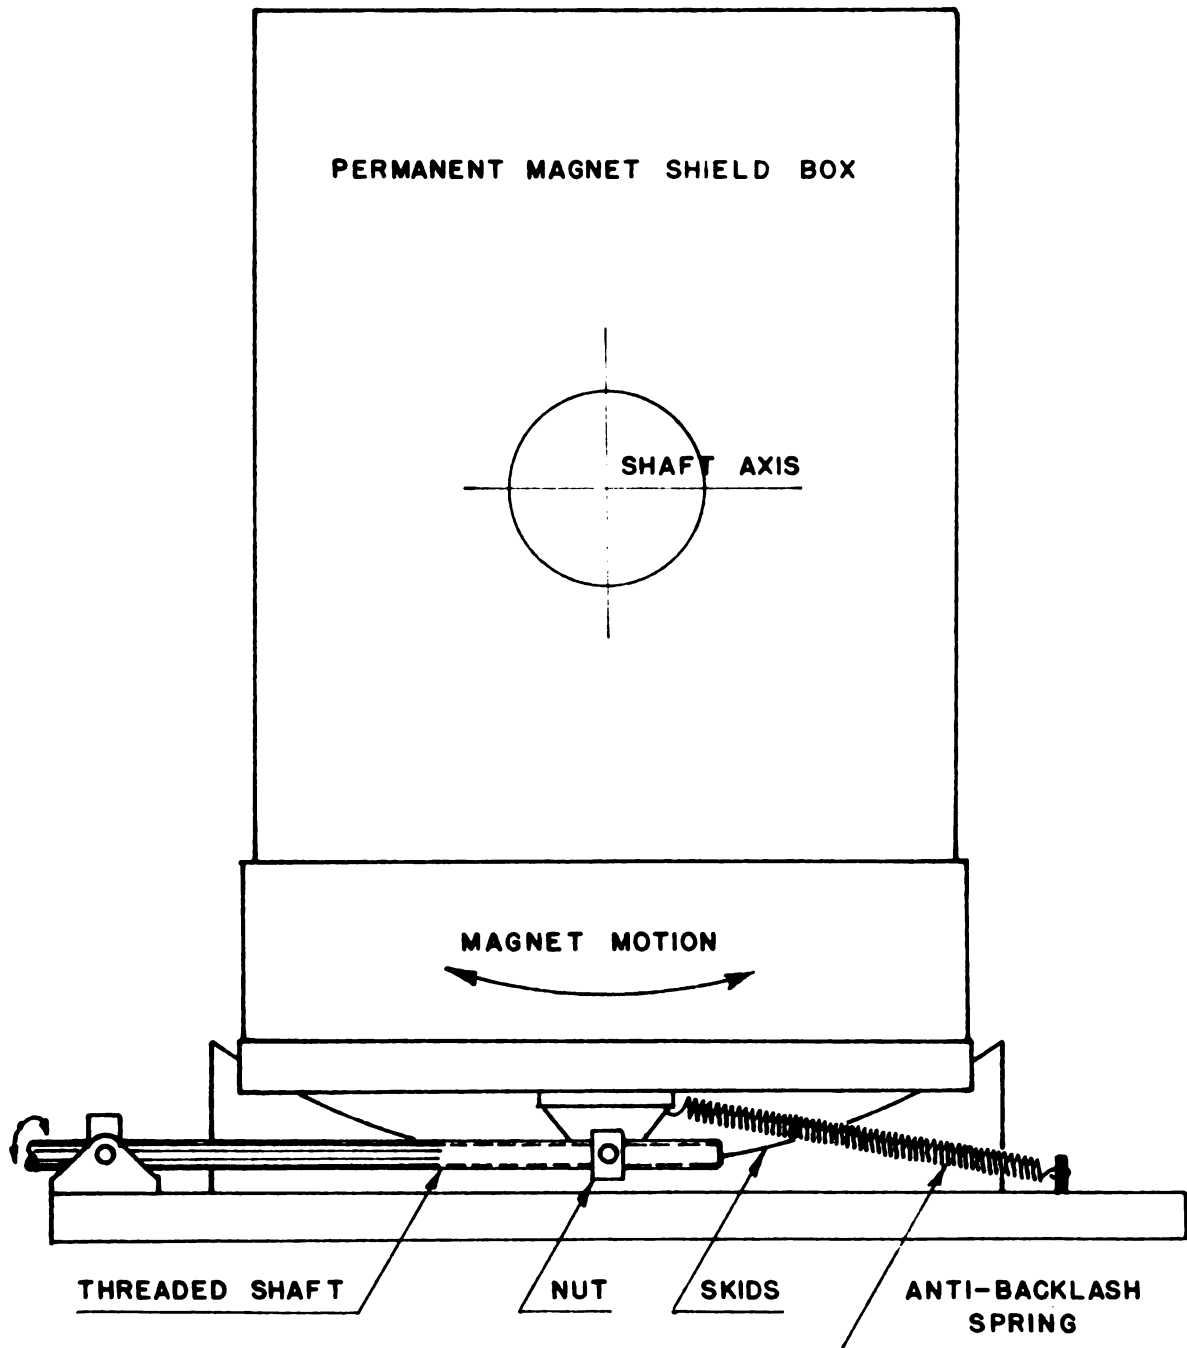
PERMANENT MAGNET ASSEMBLY.
